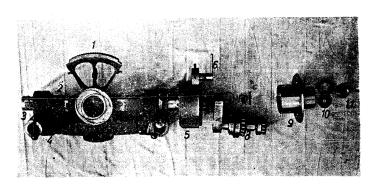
AXLE WITH EQUALIZER AND SPRING
